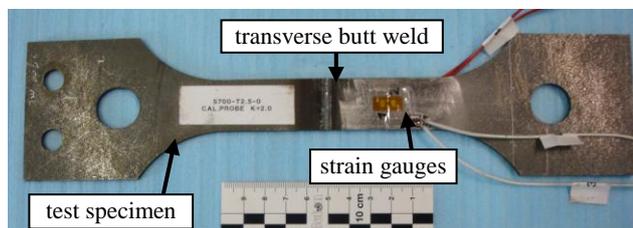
Test specimens with a butt weld for the fatigue tests
